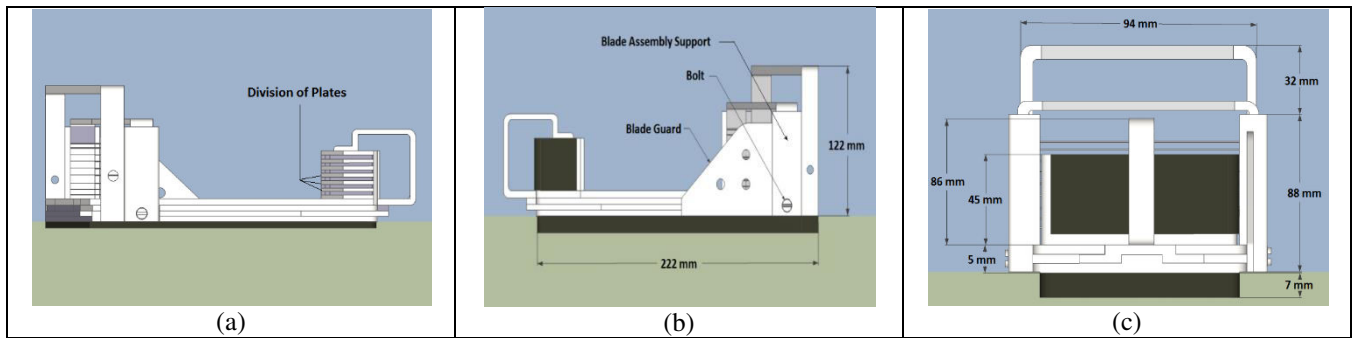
(a) Left side view, (b) Right side view, and; (c) Front view of the device.
